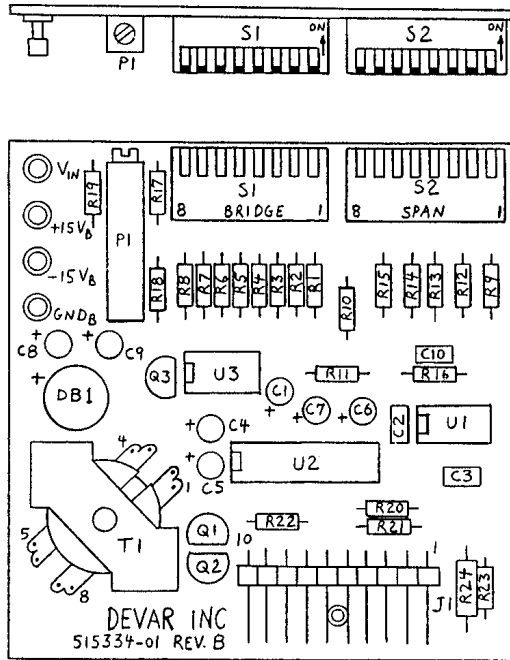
RTD, mA INPUT CARD ASSEMBLY
